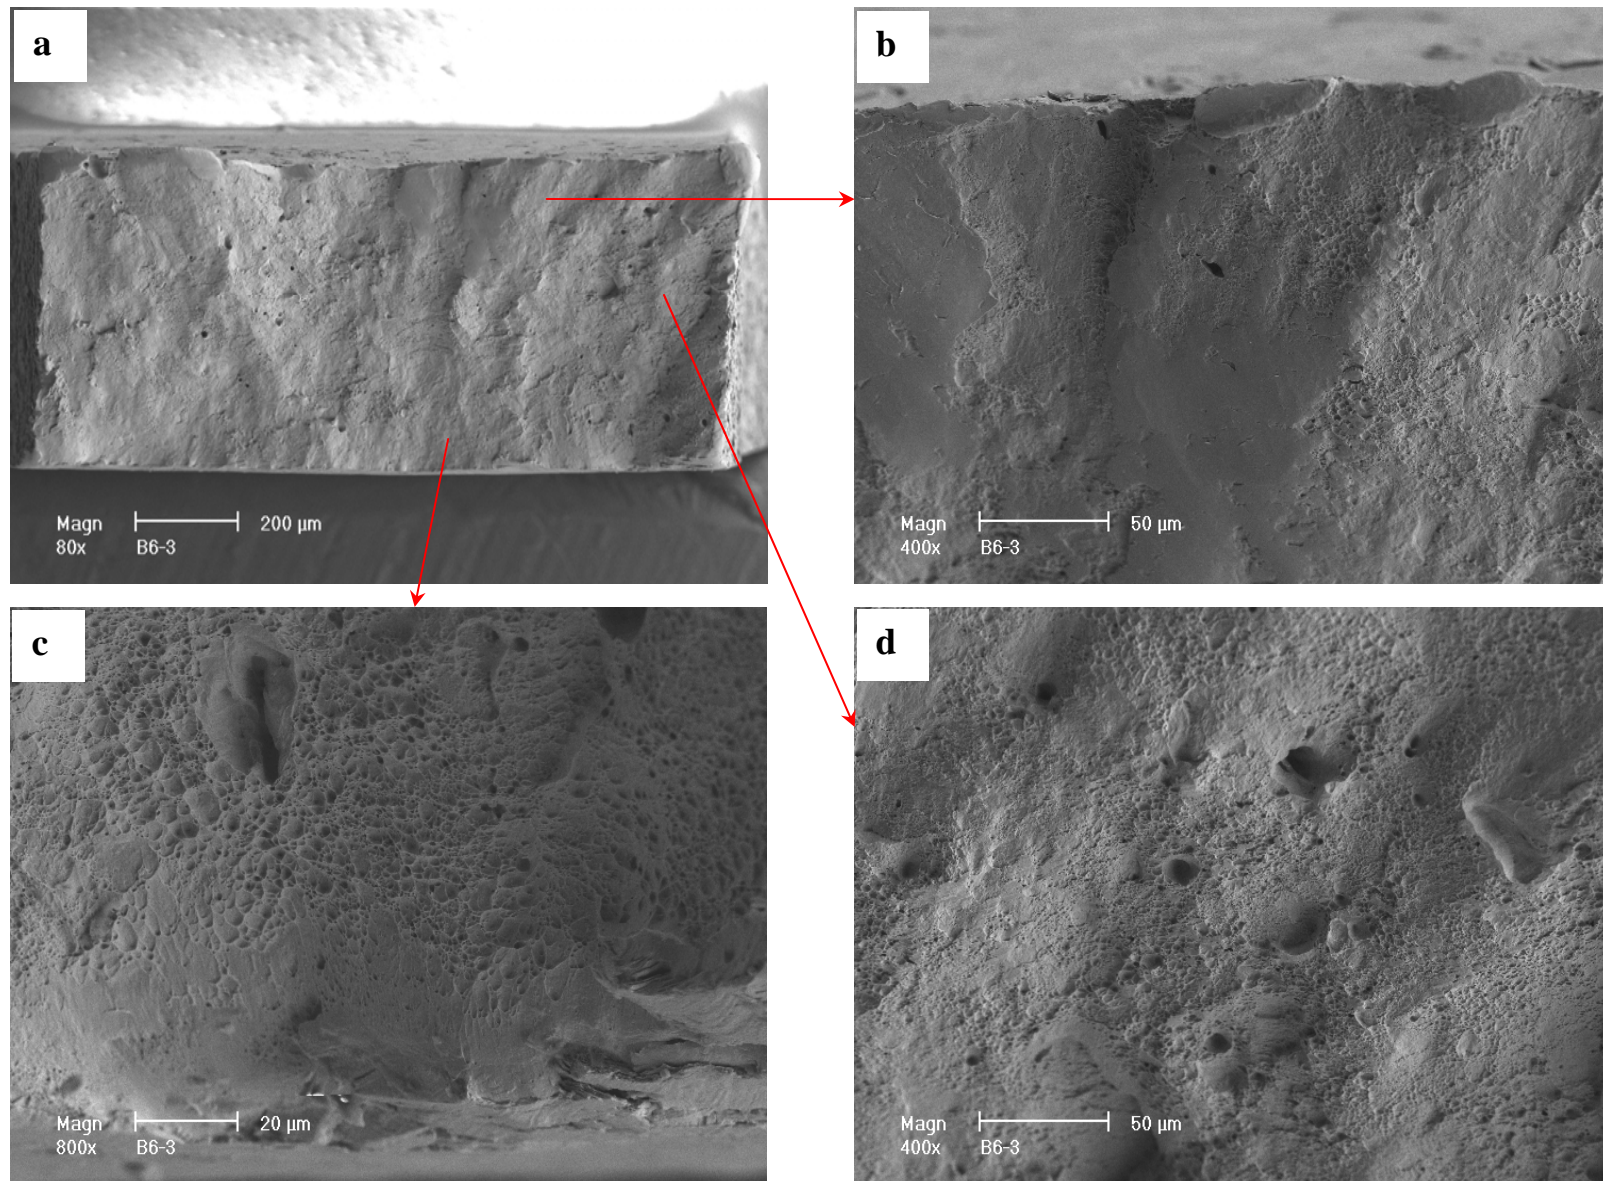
Fracture surface of CW Type 316 SS irradiated to 11.8 dpa and tested in air (specimen B6-3).
